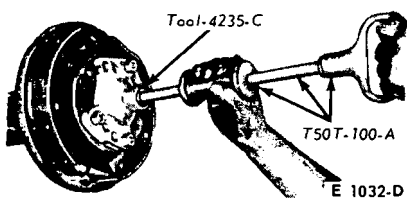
Removing Axle Shaft—Removable Carrier Type Axle
